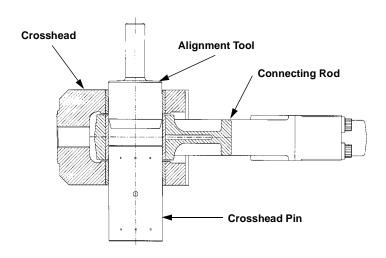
CROSSHEAD PIN ALIGNMENT TOOL (B-1989) - TYPICAL
